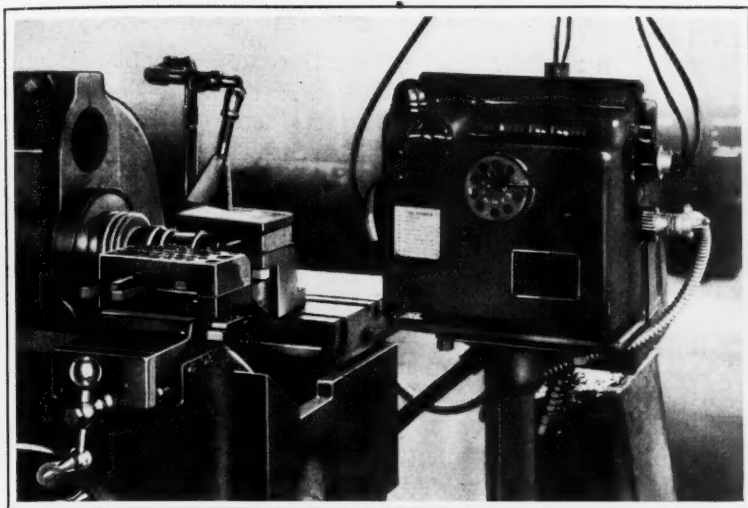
In the Metal-working Field, the Chronolog is Applicable to Many Types of Machine Tools and Other Machinery
